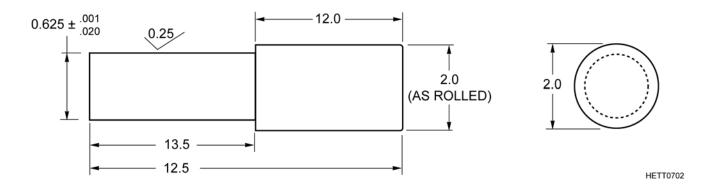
REMOVAL TOOL (SUSPENSION CYLINDER PIN) (SW34436)
